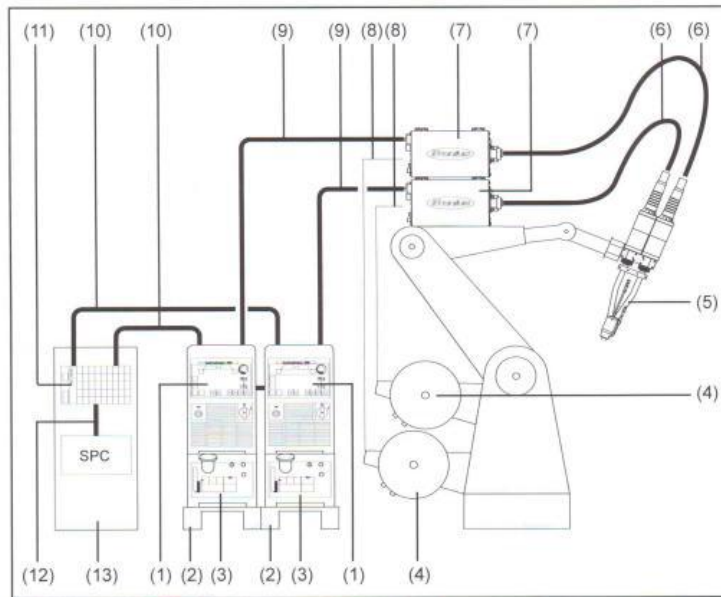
Simple drawing of welding set up and wire spool connecting with robot [28].
